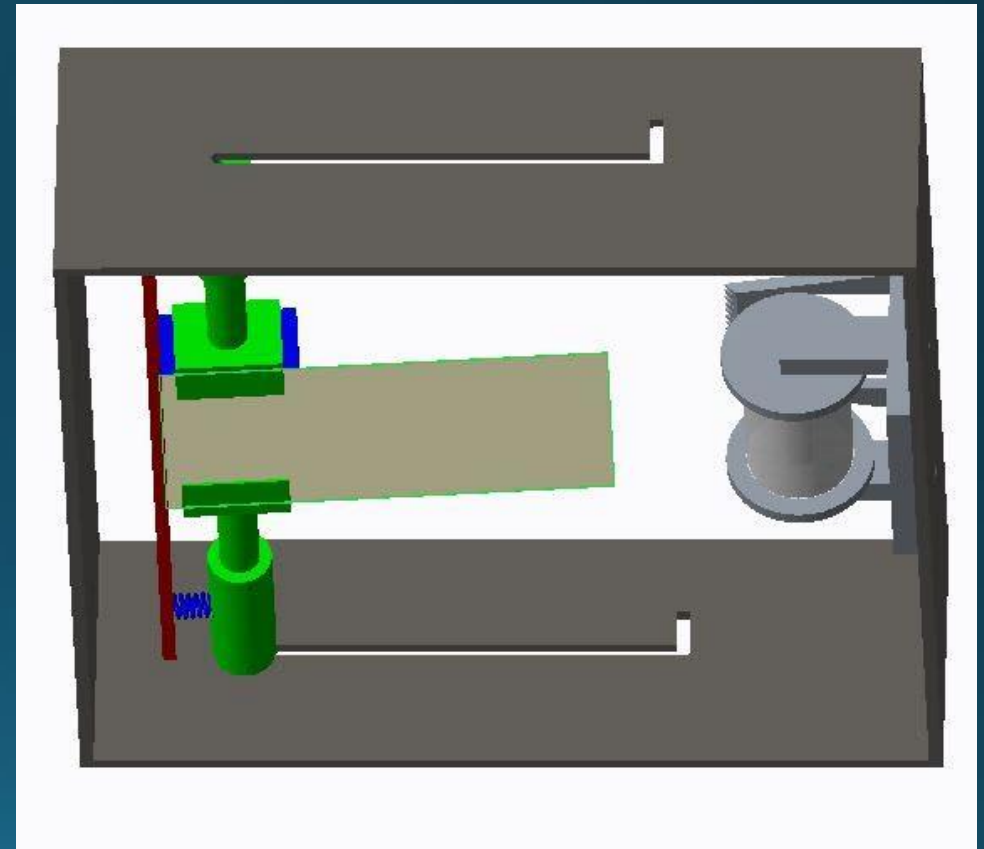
Wrapping machine with capacitor assembly and attached insulation paper
